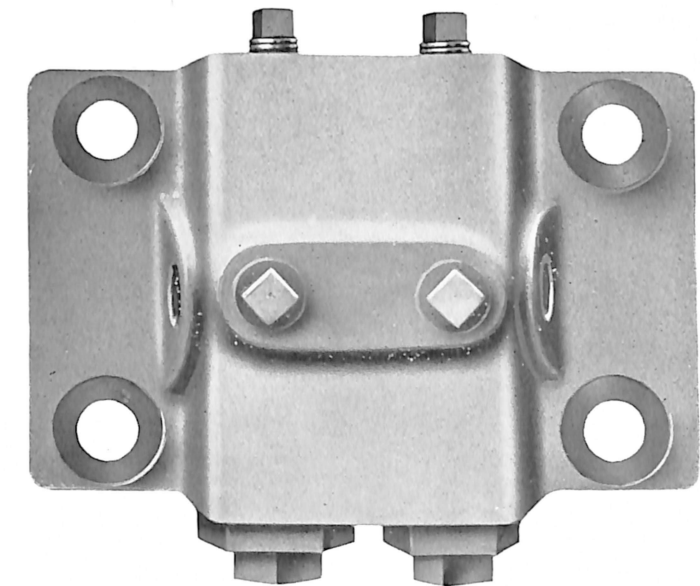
Ball Checked Valve for Engines of Types "E," "F," "K," and "L."
